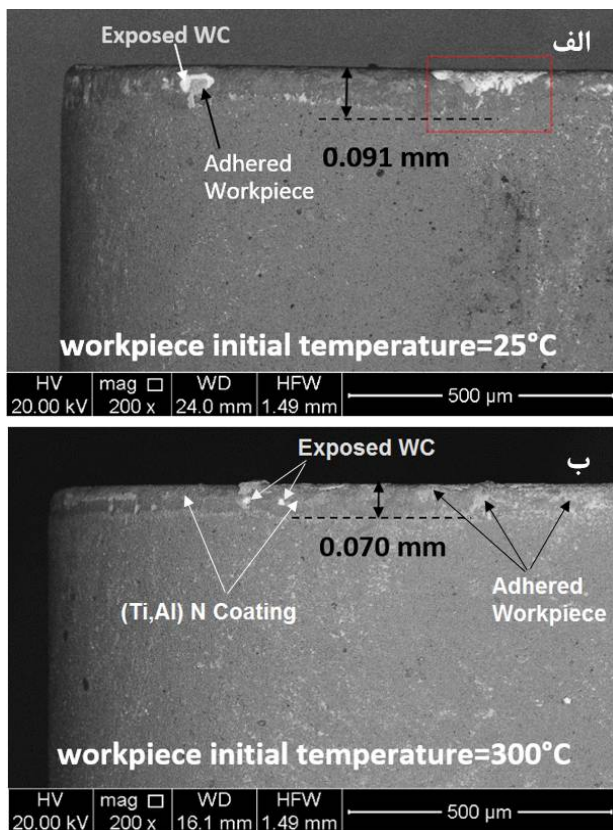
Cutting tool flank wear after 3 minutes cutting with 62m/min, 0.102mm/rev; a) conventional turning, b) turning at 300°C
